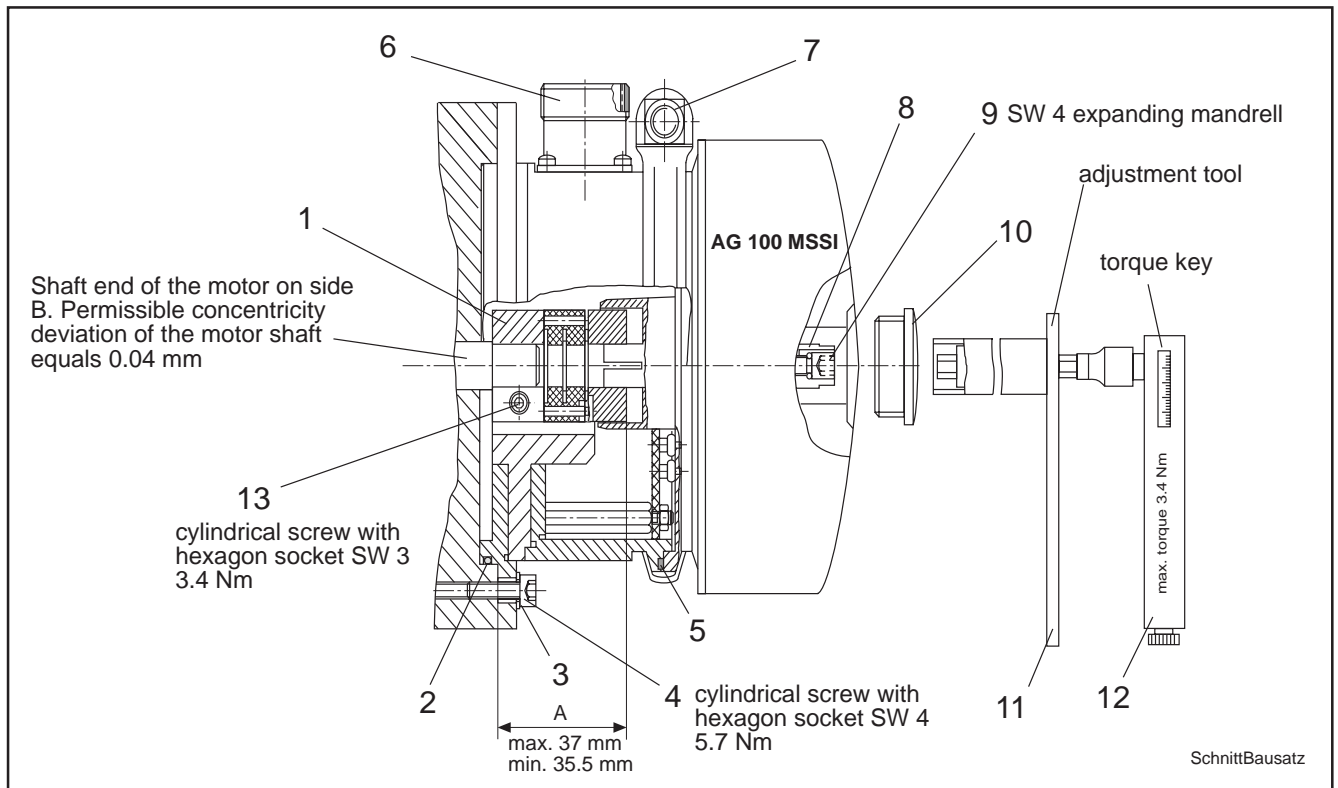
Cross-section drawing of absolute encoder mounting set AM 174 SG
